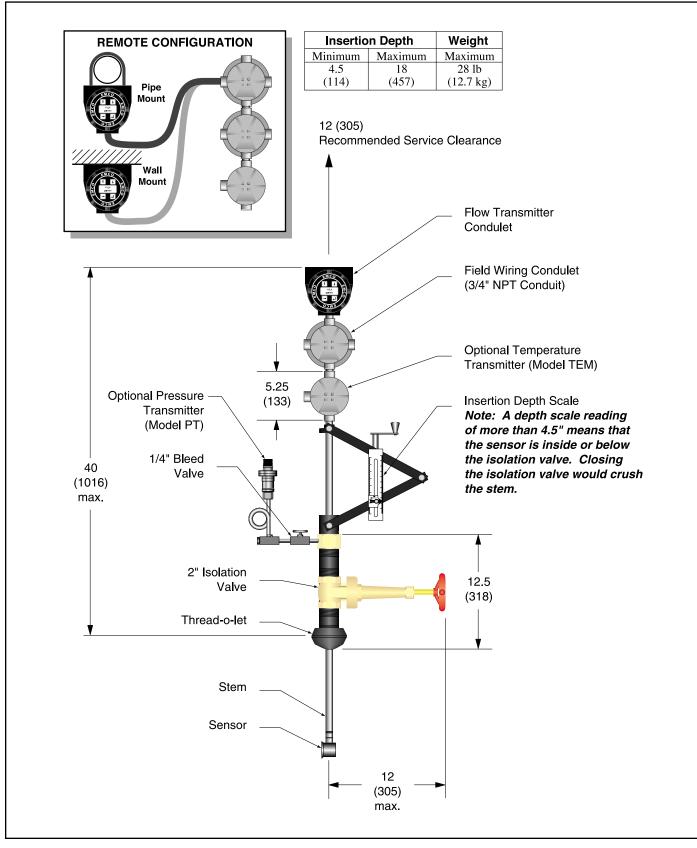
V-Bar-600/60S Dimensional Outline. All dimensions are in inches (millimeters).
